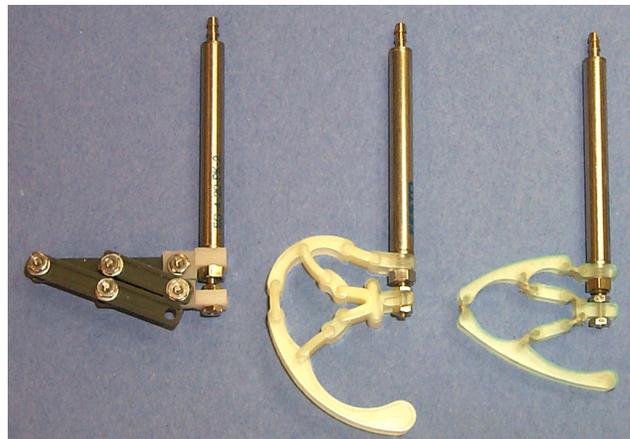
Linkages for extending piston stroke length in a legged robot. Left: original version with fasteners, pins and bearings has 31 components in addition to the piston. Middle: an early fabricated prototype with hard links and thick flexures of soft material. Right: improved linkage with hard links and thin but tough fabric-reinforced flexures encased in soft material.
